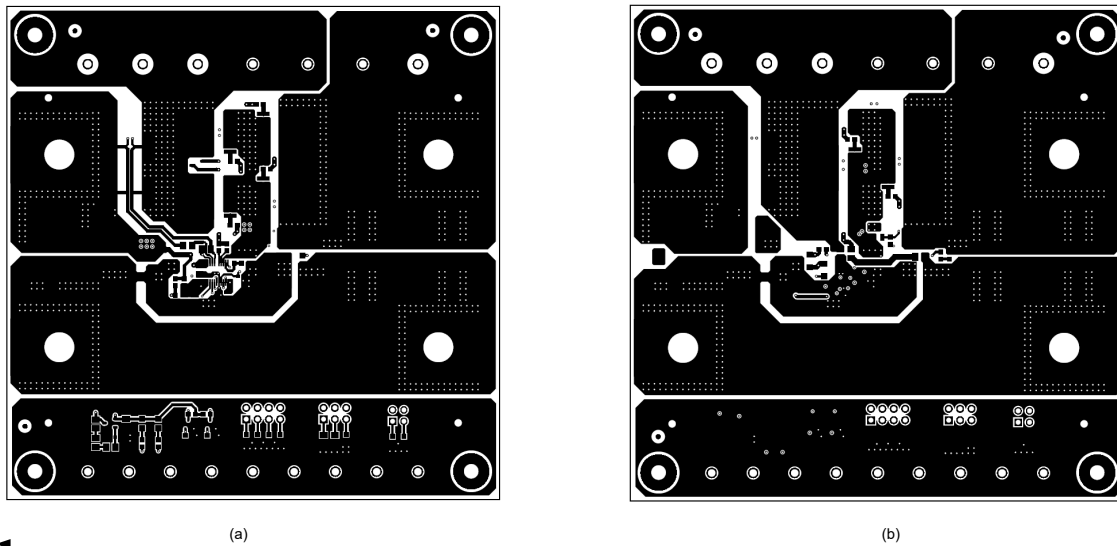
TPS48111Q1EVM Board (a) Top Layer (b) Bottom Layer
